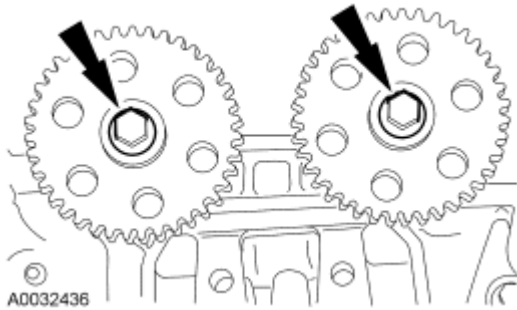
Identifying Bolts And LH Timing Chain Guide
